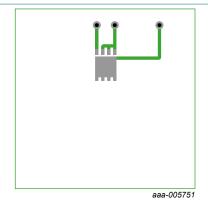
PCB layout for thermal resistance junction to ambient minimum footprint;FR4 board; 2oz copper
